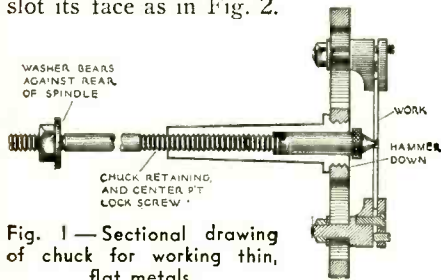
Sectional drawing of chuck for working thin, flat metals.
